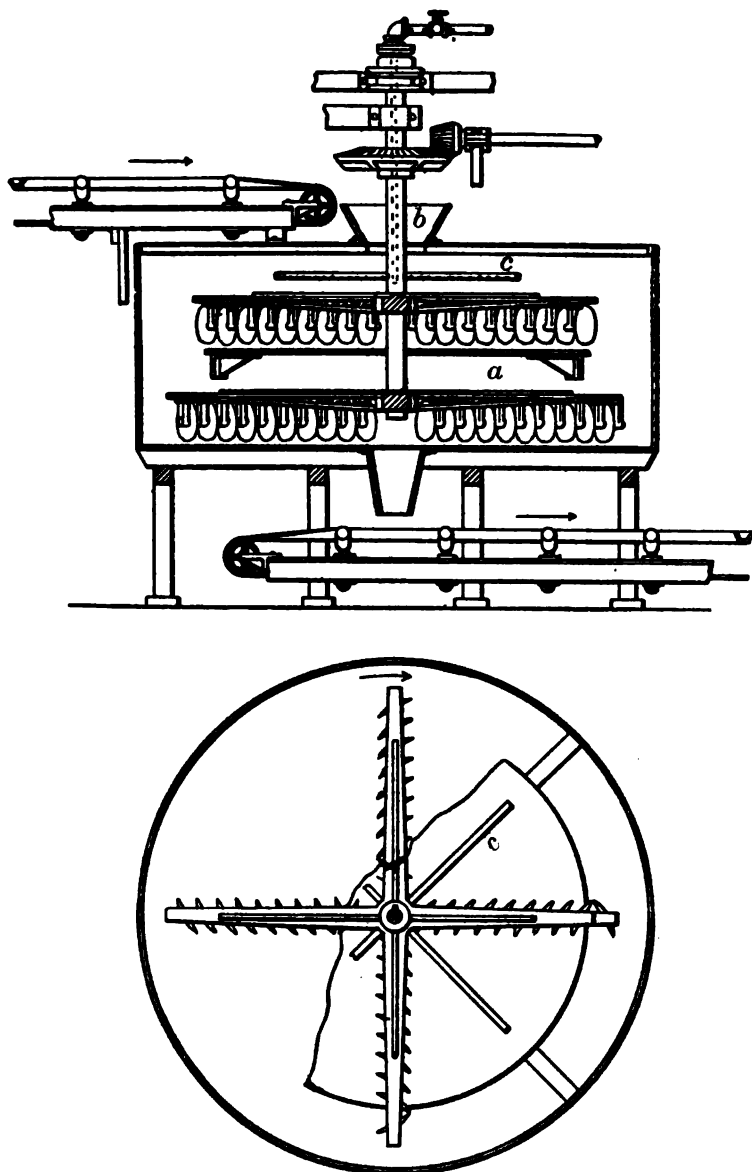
The Blaisdell Mixer for moistening pulverised ore with cyanide solution ; sectional elevation and plan.
